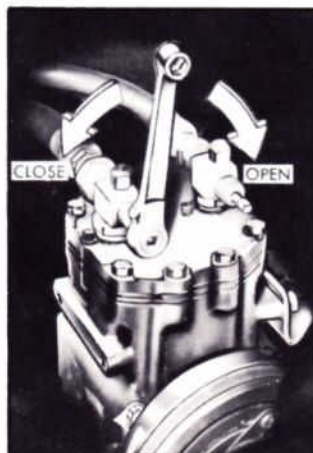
Location of Low Pressure Service Valve and Gauge Port at Compressor Head
